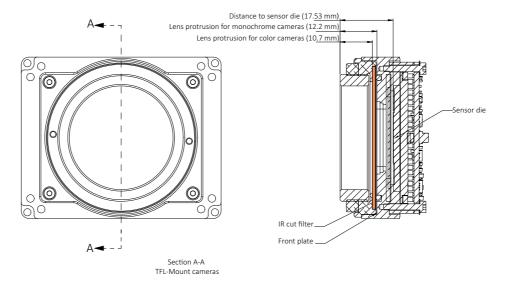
Cross section of Prosilica GT Large Format camera front assembly with TFL-Mount
